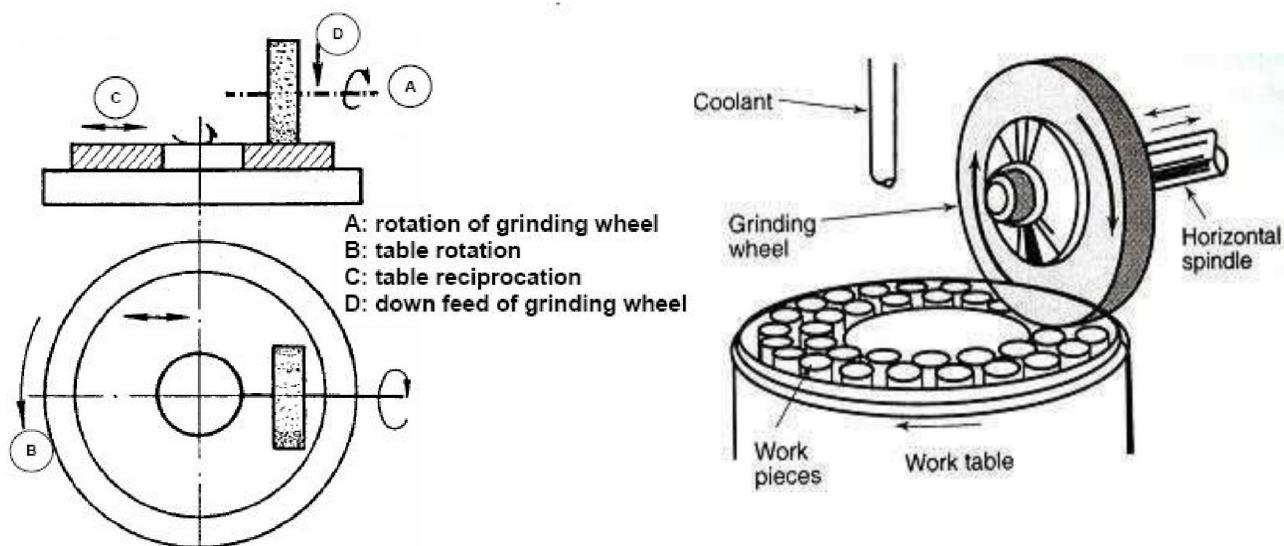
Surface grinding in horizontal spindle and rotating table grinding machine
